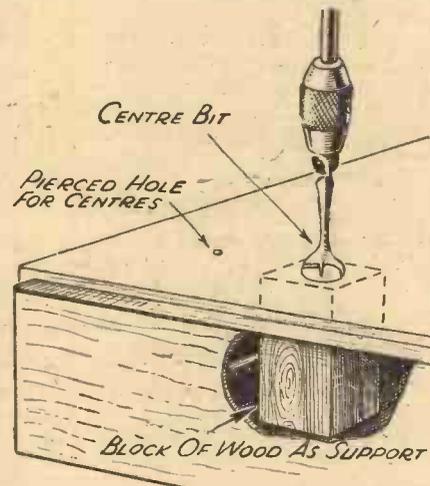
After making small centre holes from the inside of the cabinet full size holes should be traced out on the front, using a centre bit.
